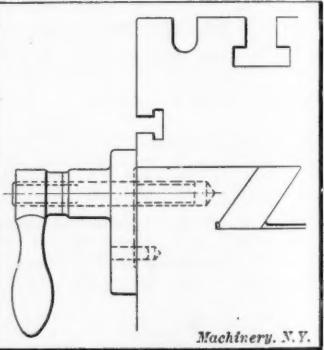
Clamping Plate for Edge of Milling Machine Table
